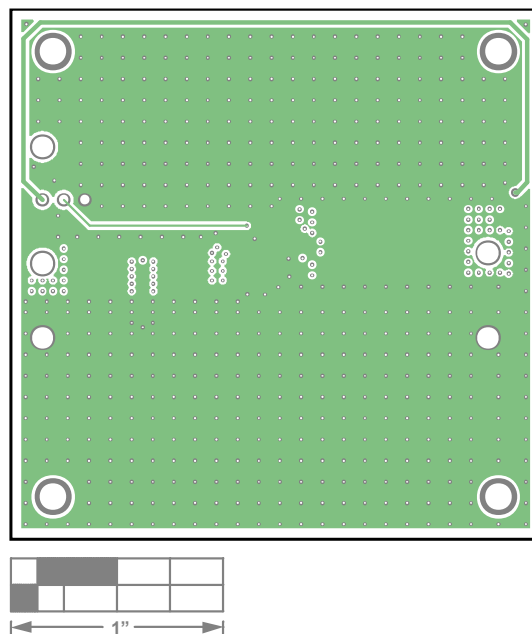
EVAL-ADPL21504-AZ Evaluation Board PCB Layout—Layer 3
